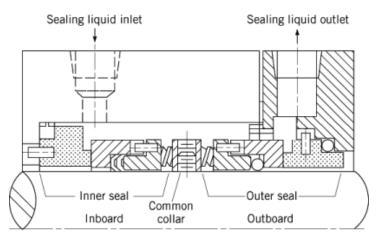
Double-seal arrangement for mechanical seals.(Courtesy of Durametallic Corp.)
